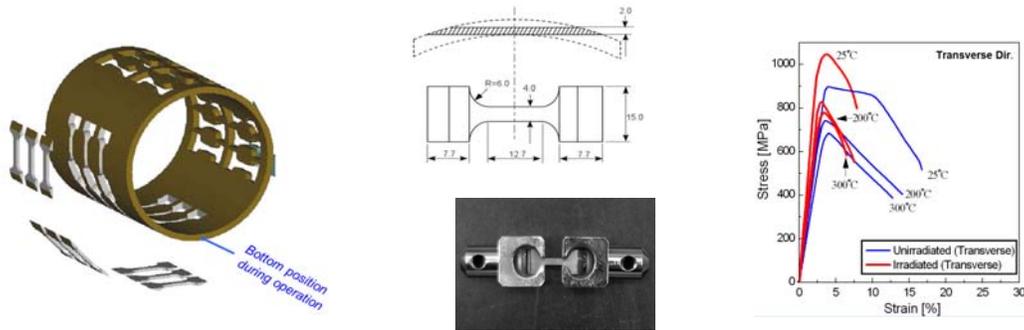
A cutting plan of the tensile specimen in the irradiated tube
